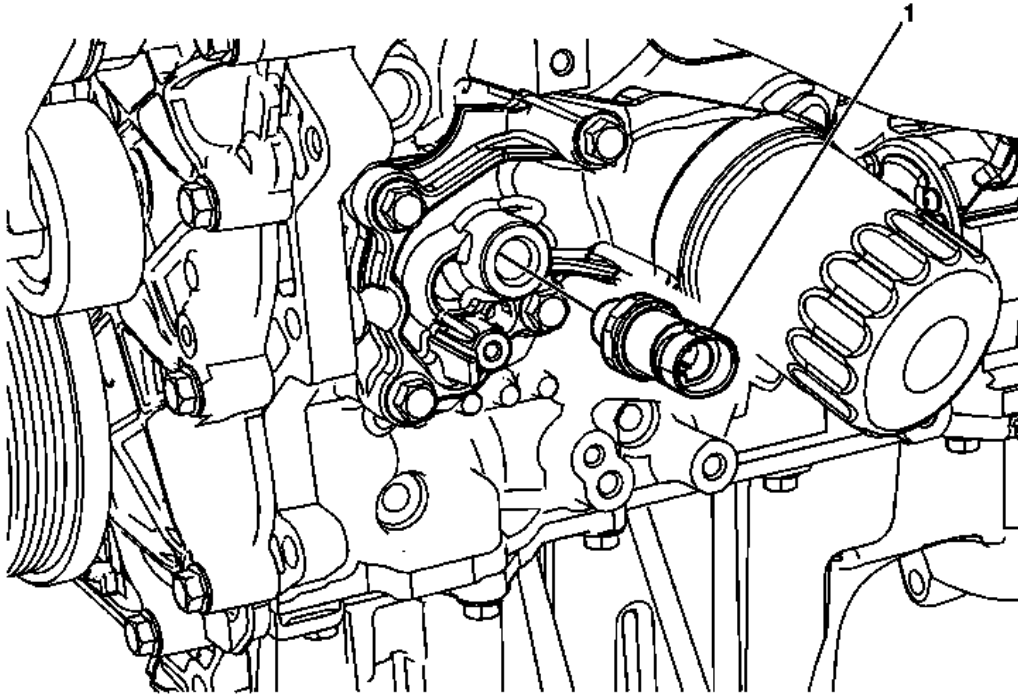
Engine Oil Pressure Sensor And/Or Switch (LF1)
